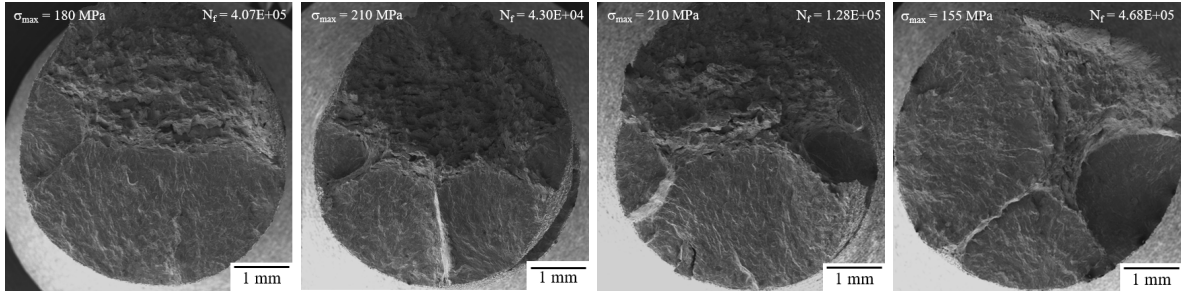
Multiple fatigue fracture surfaces found on 5.0 mm as-built high-stress, low-cycle samples.
